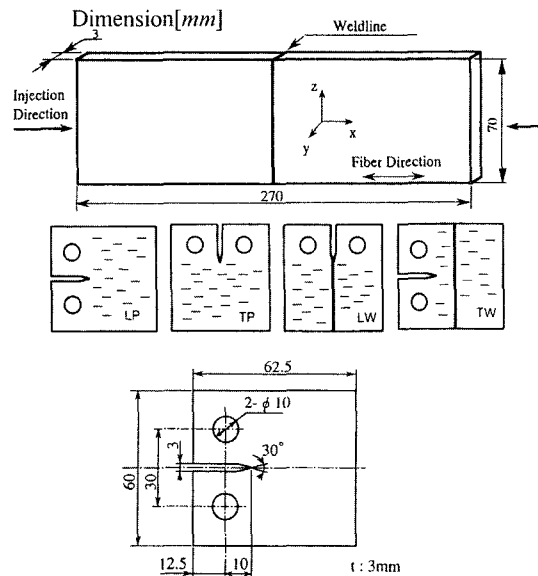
Layout and dimensions of injection mold and extraction of CT specimen
